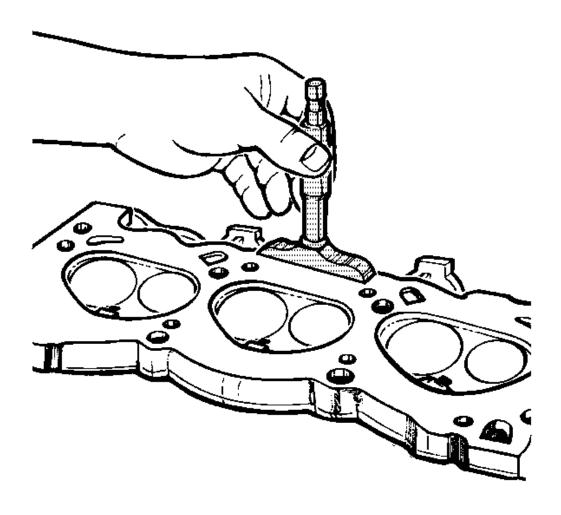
Measuring Cylinder Head Height From deck Surface To Cast Pads Courtesy of GENERAL MOTORS CORP.
